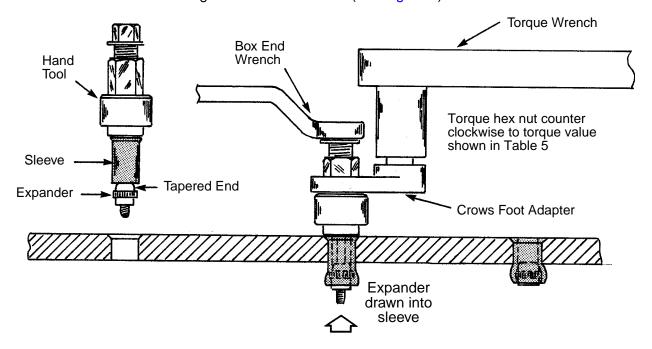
Installation of Blind Nut using Hand Tools (typ.)
